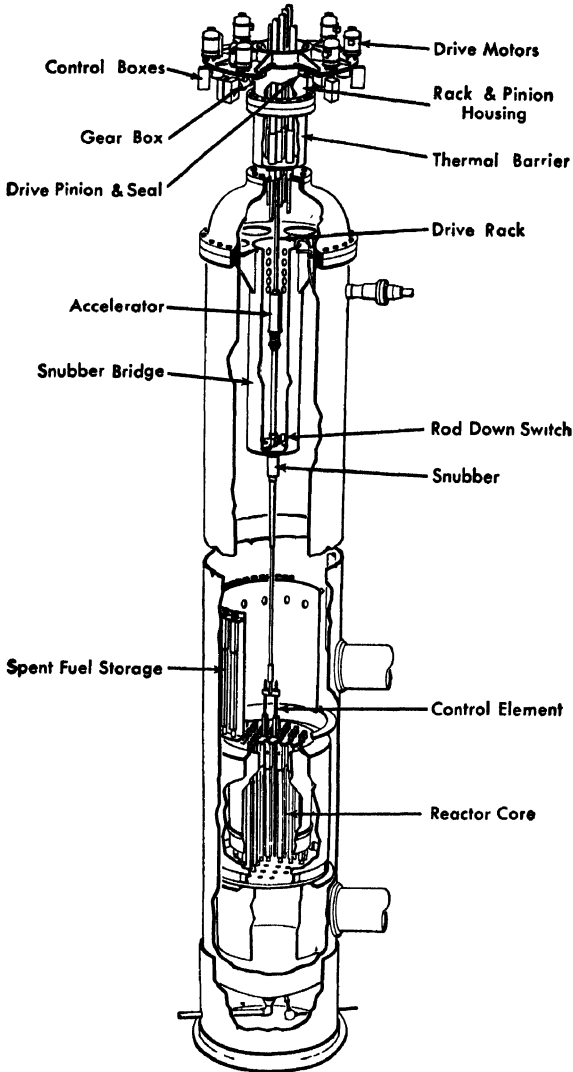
Cutaway drawing of OMRE reactor vessel.
